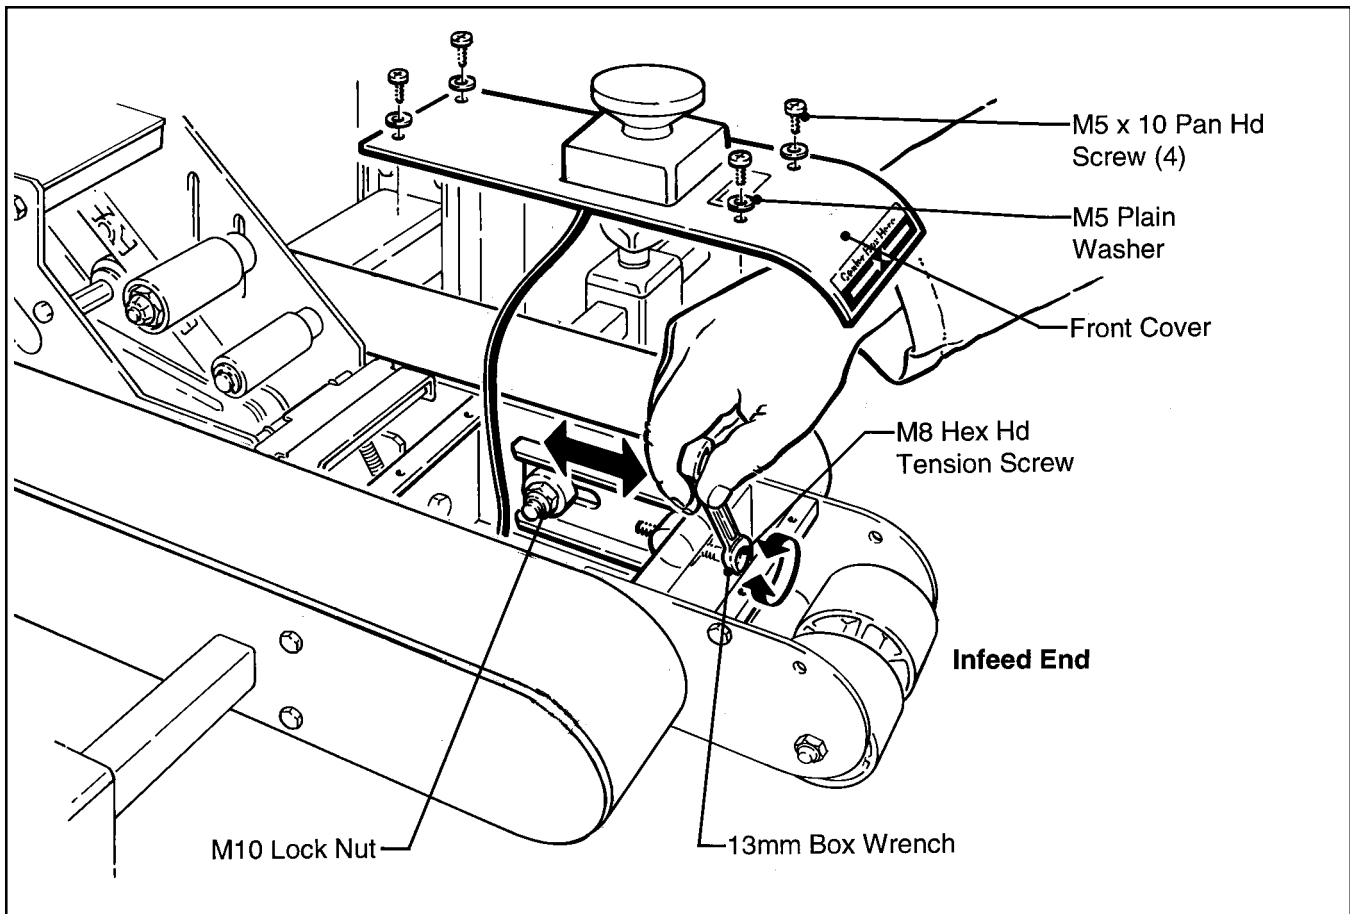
Box Drive Belt Tension Adjustment, Upper Belts (Infeed End)
